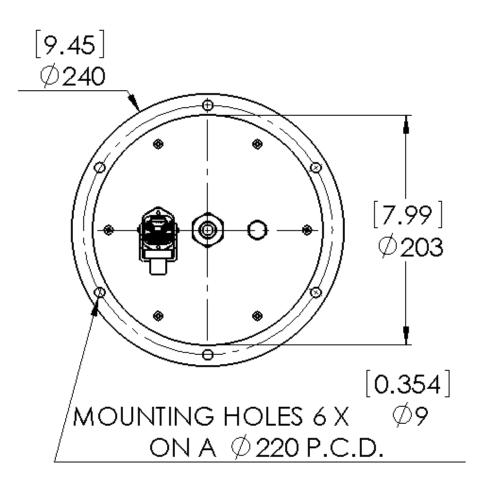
RE08 Scan Head Mechanical Dimensions
